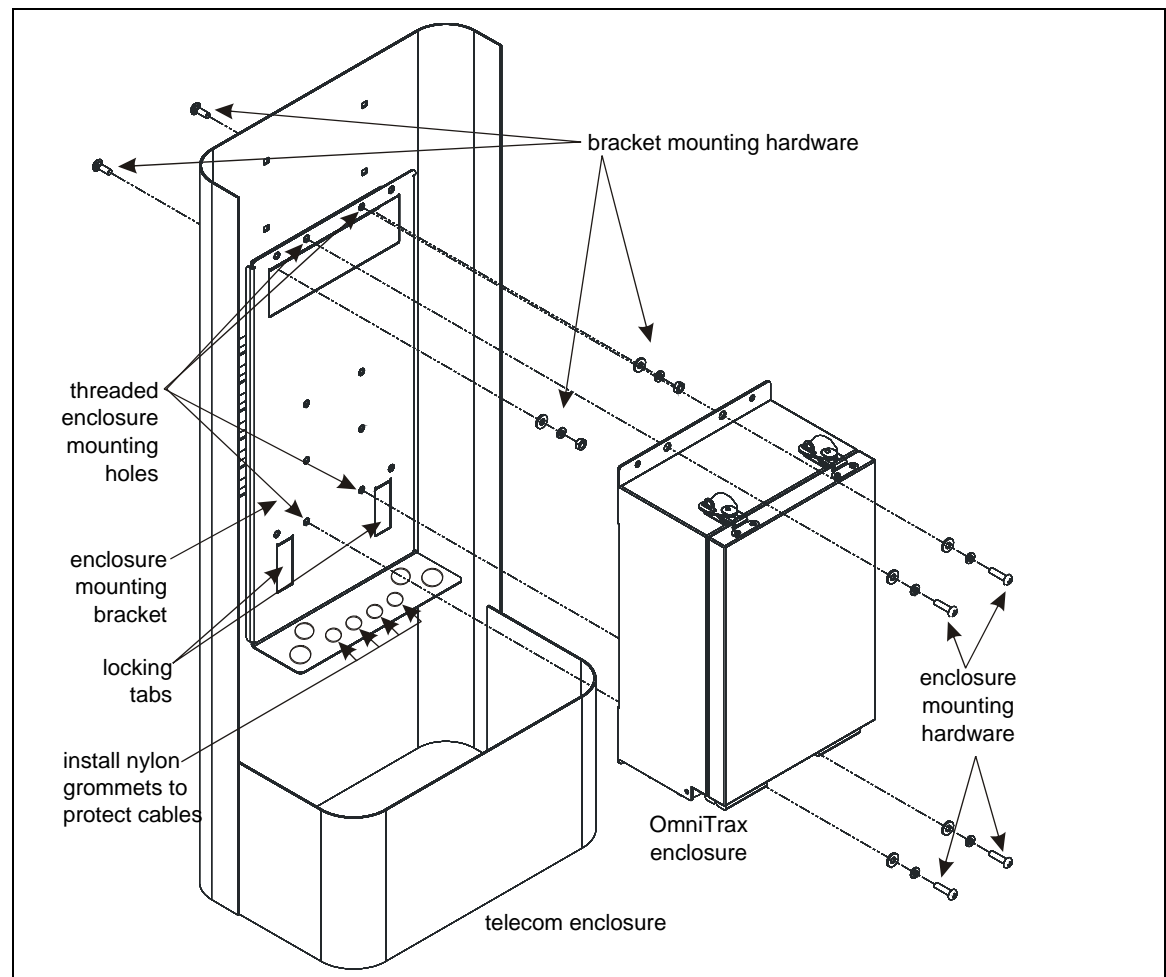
Mounting the bracket and OmniTrax enclosure - front view
